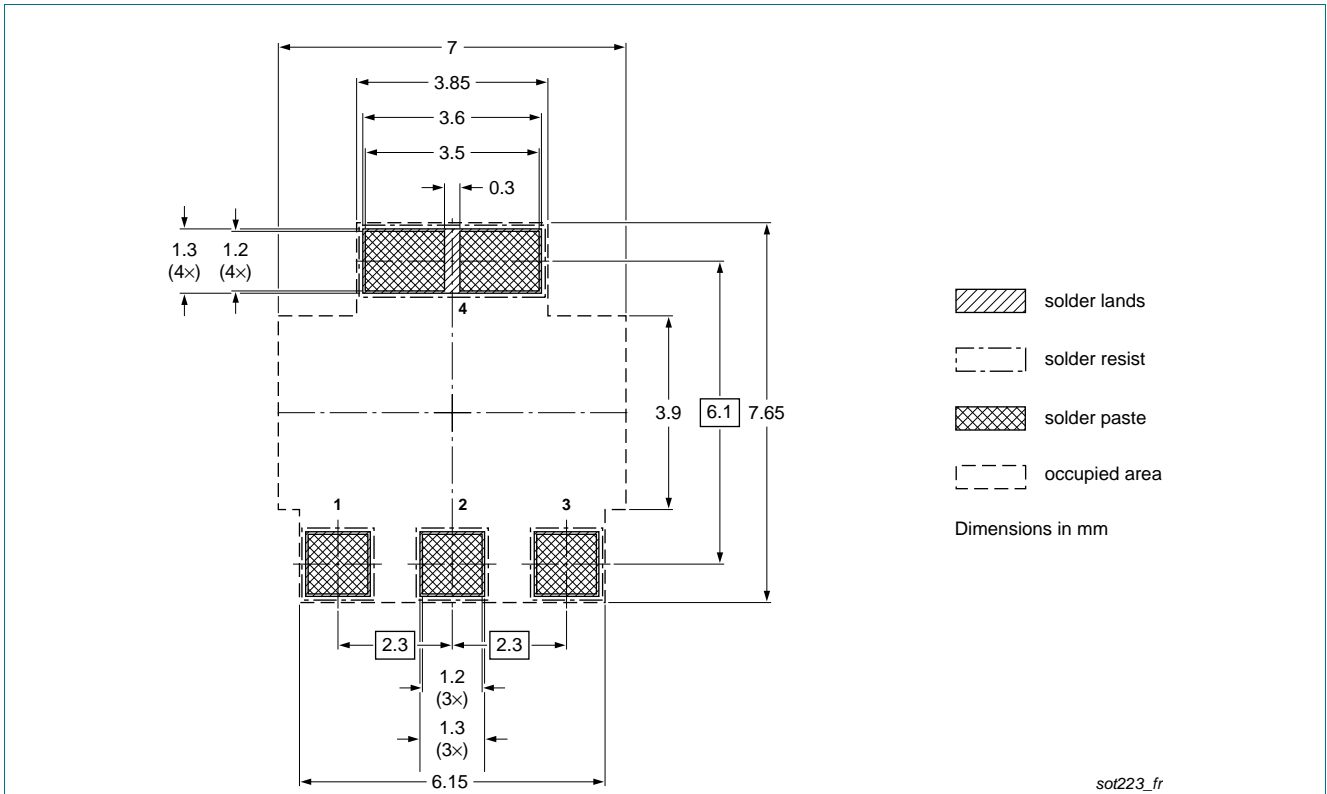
Reflow soldering footprint for SOT223 (SC-73)
